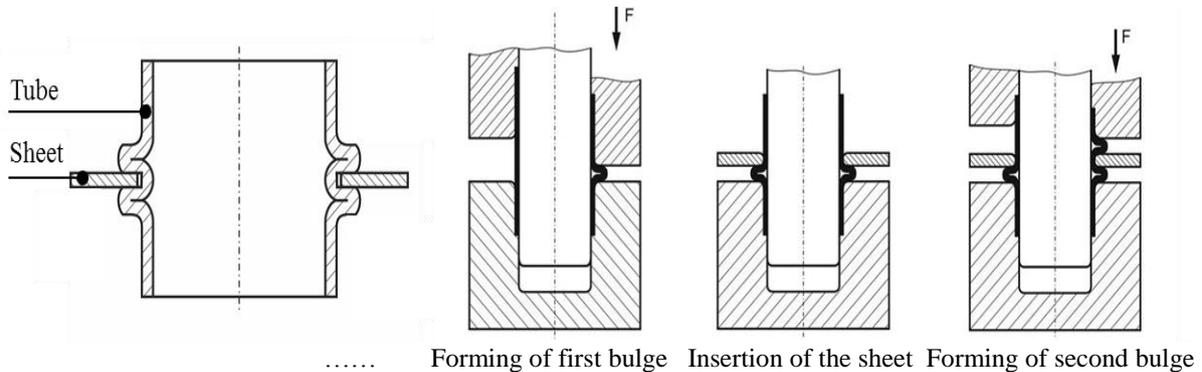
Cross section of tube-sheet-joint and standard upset bulging process (schematic)
